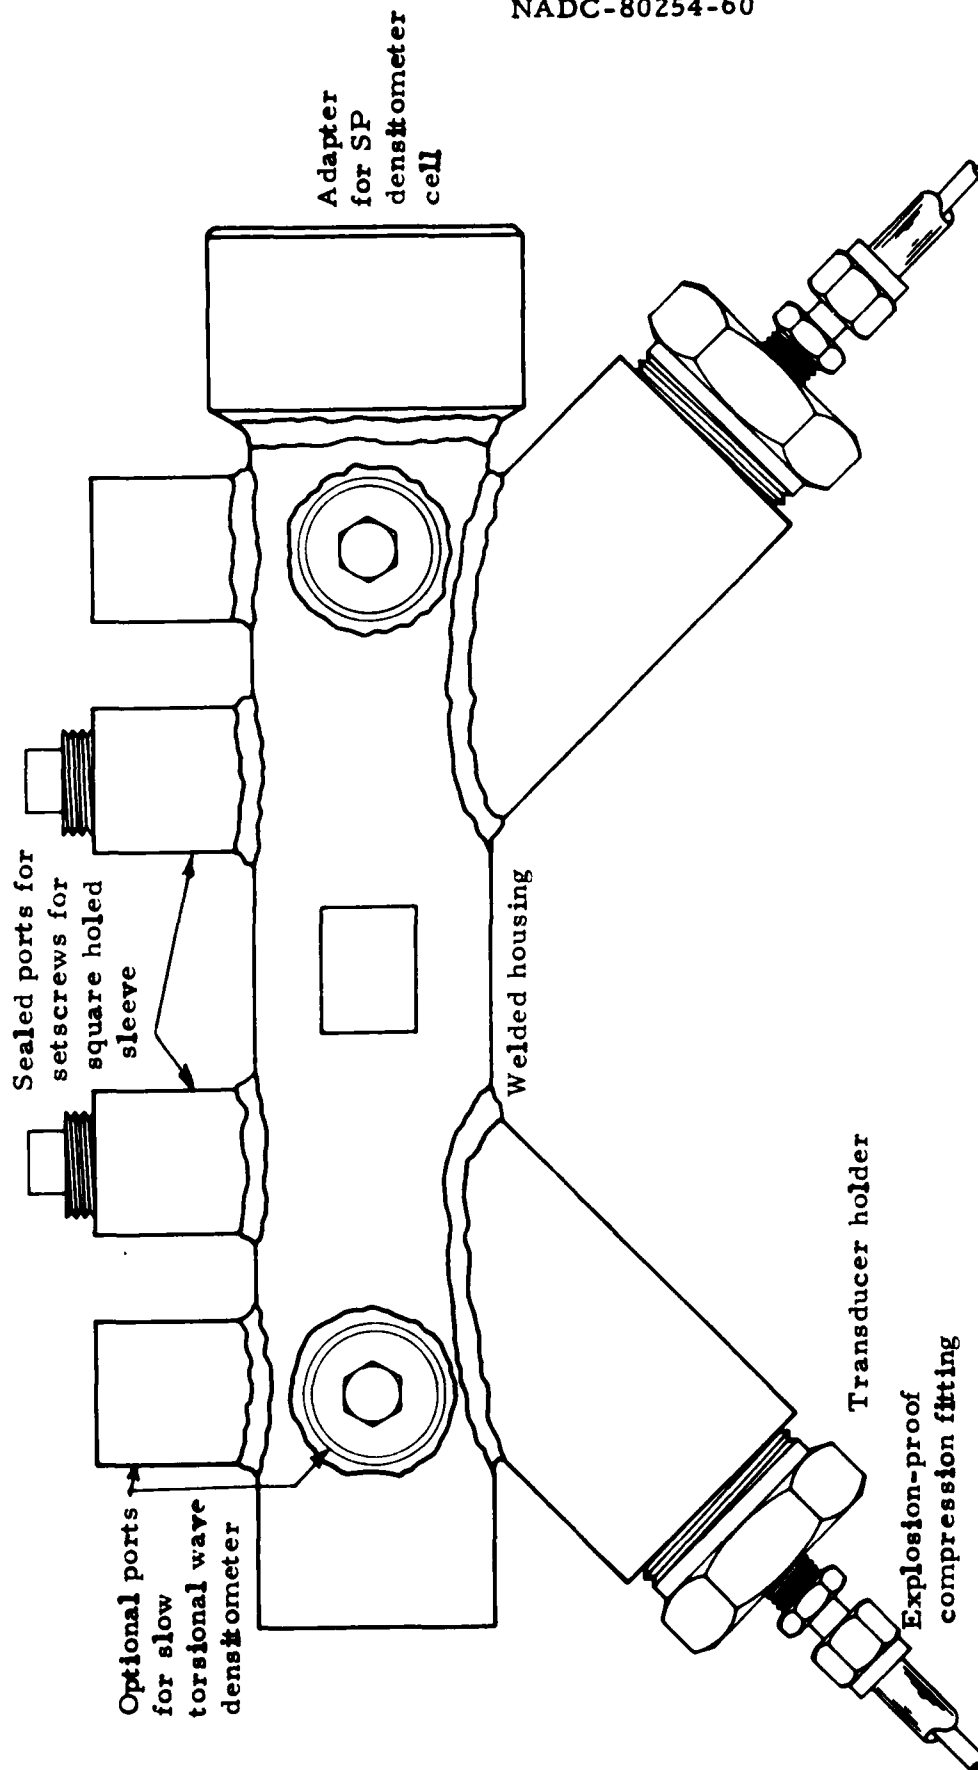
Outline drawing of equipment shown in Fig. 13 in which the key components are identified.
